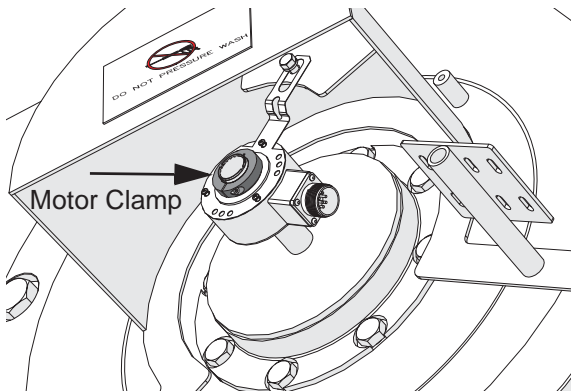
Encoder with Motor Clamp Outside (Motor 1)
